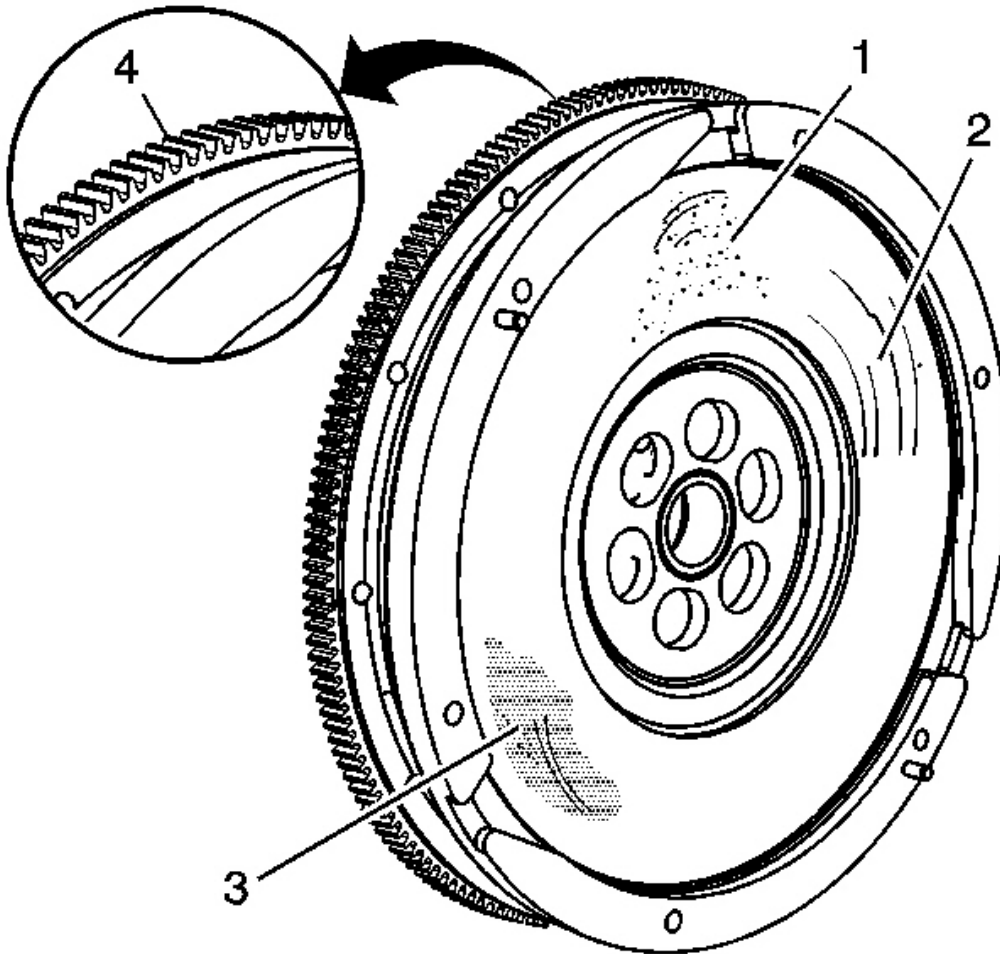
Identifying Manual Transmission Flywheel Wear & Damage
